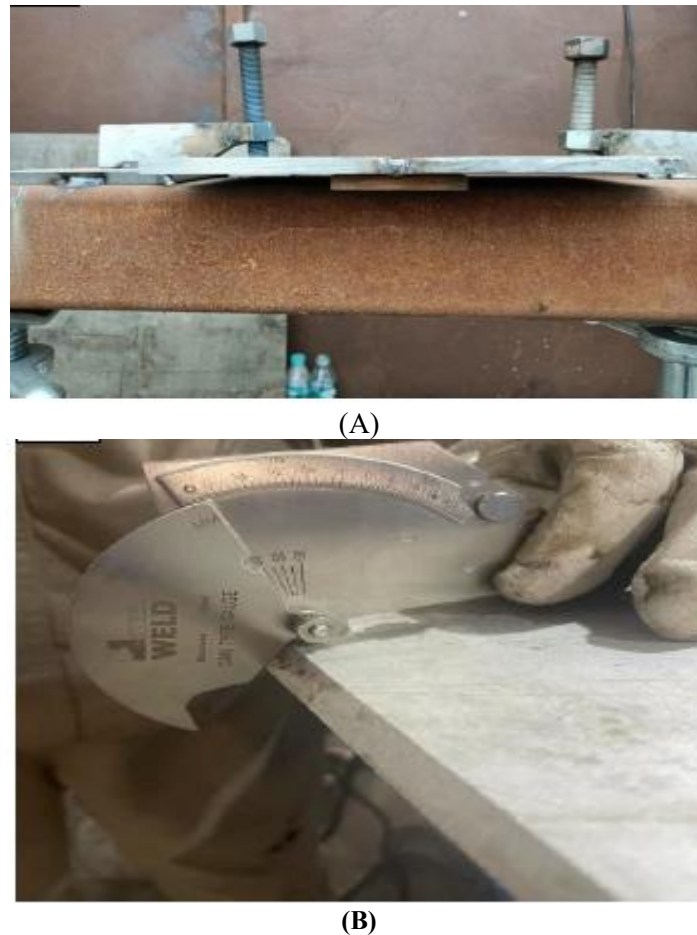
Fit-up and welding preparation (A) Back strip and mechanical fixtures (B) Stainless steel plate beveling.
